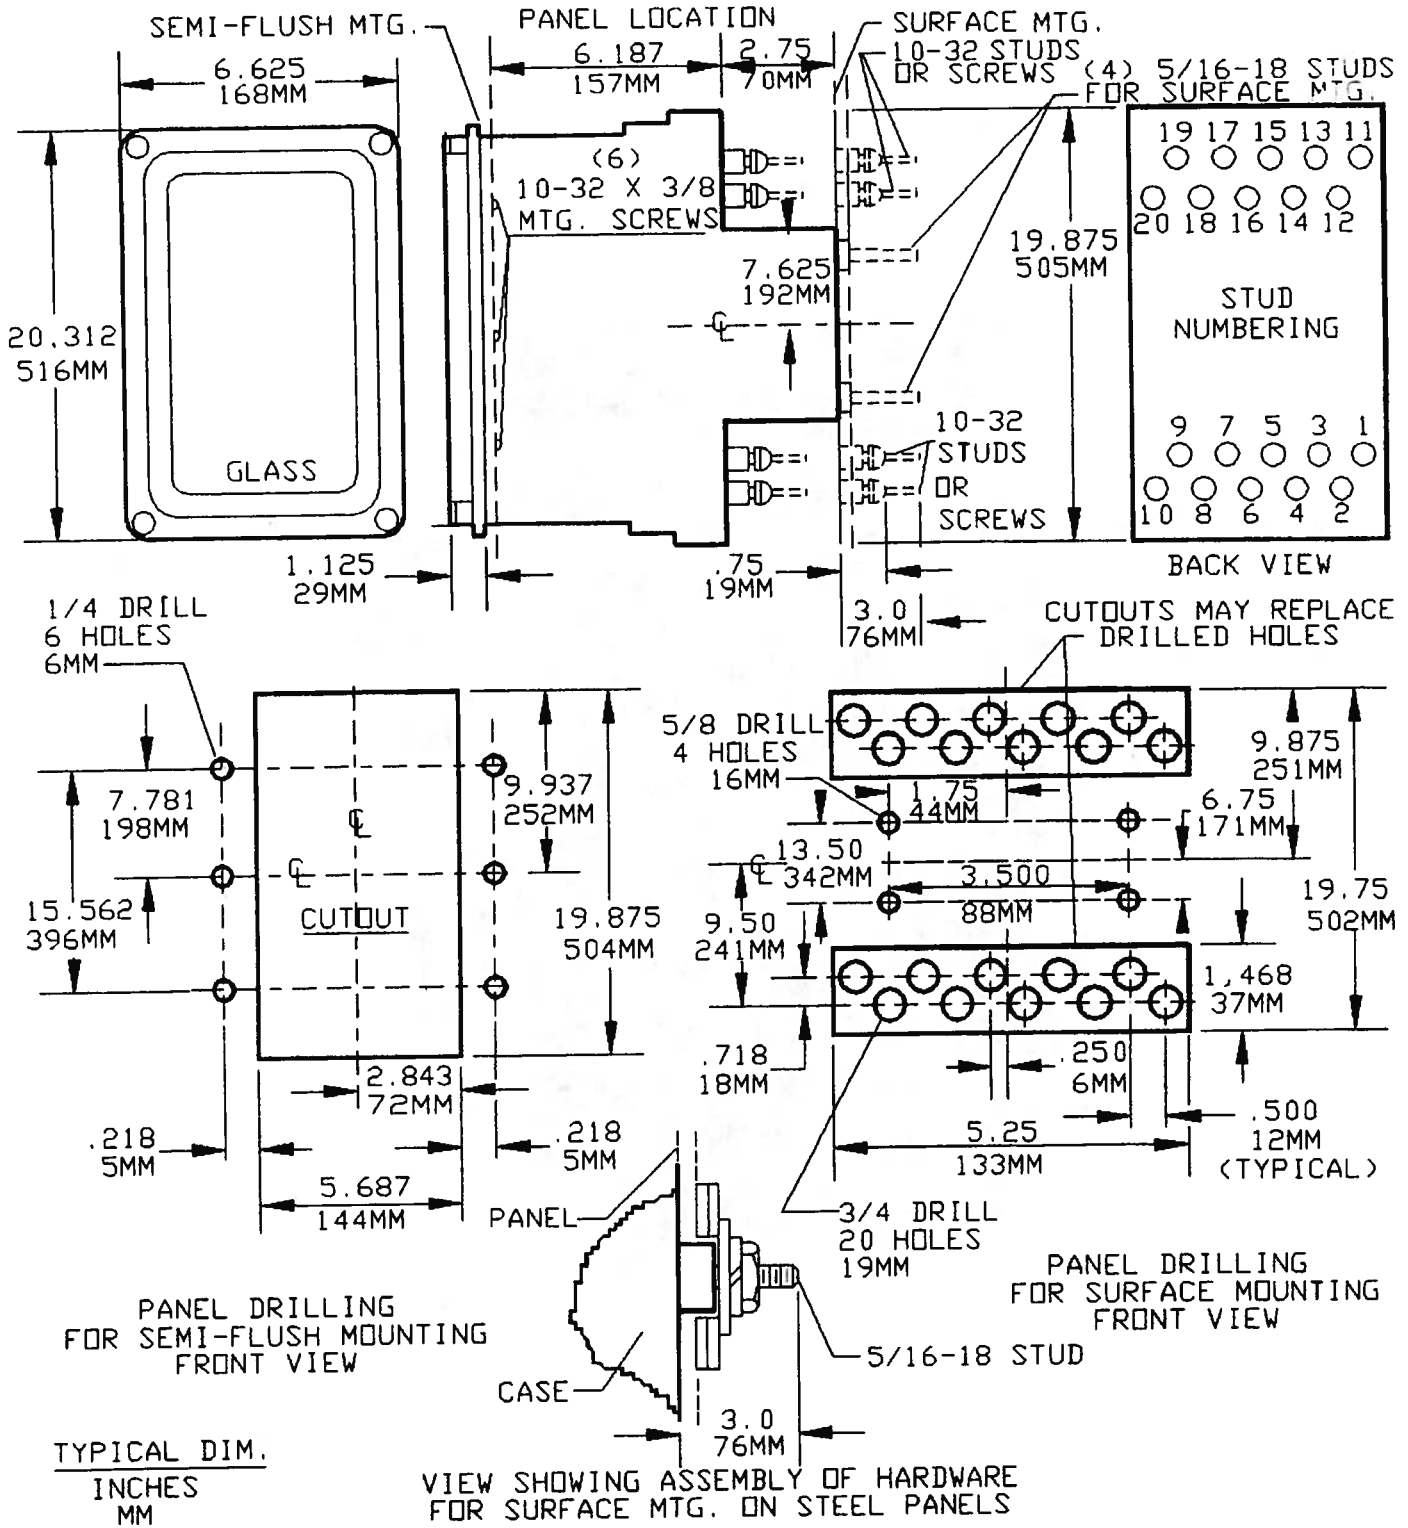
(0178A7336 [6]) OUTLINE & Panel Drilling for the Type CEB52 Relay
